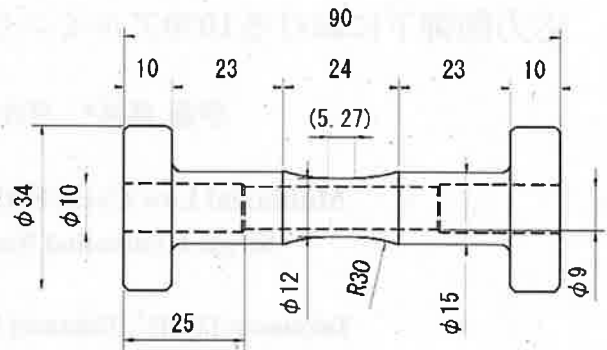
Shape and dimensions of hollow cylinder specimen tested (mm).
